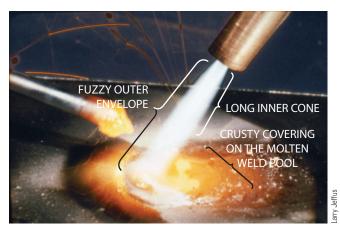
Carbonizing flame (excessive acetylene).
